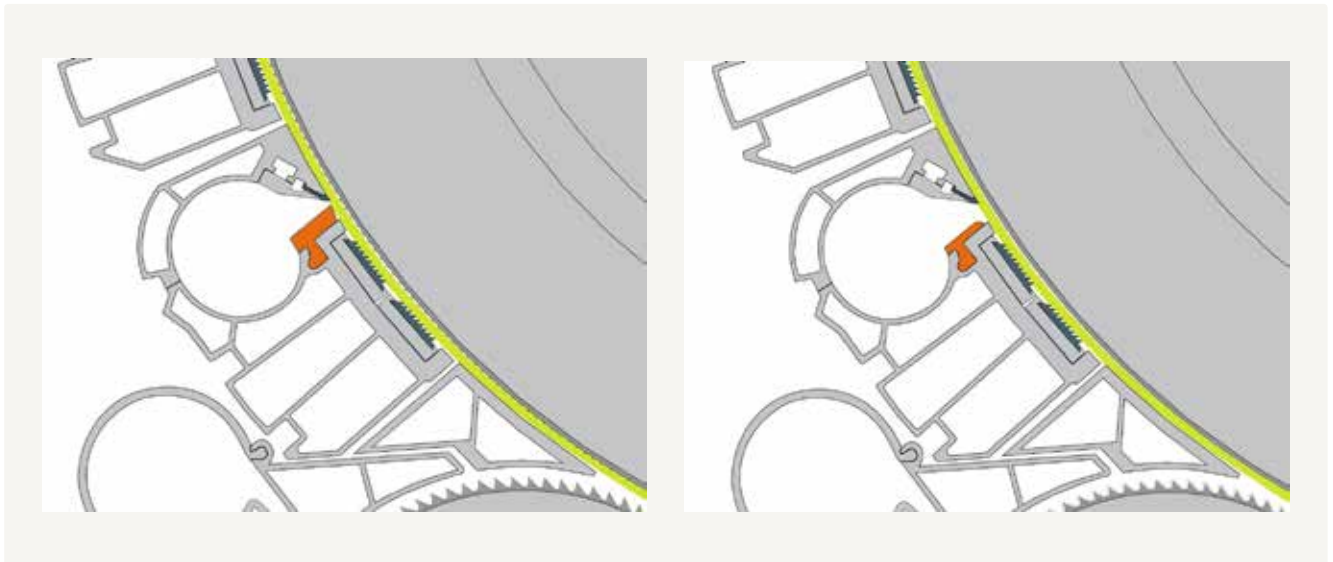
Adjustable open width of cleaning elements in a Rieter C 70 card (left: almost closed – right: completely opened)
